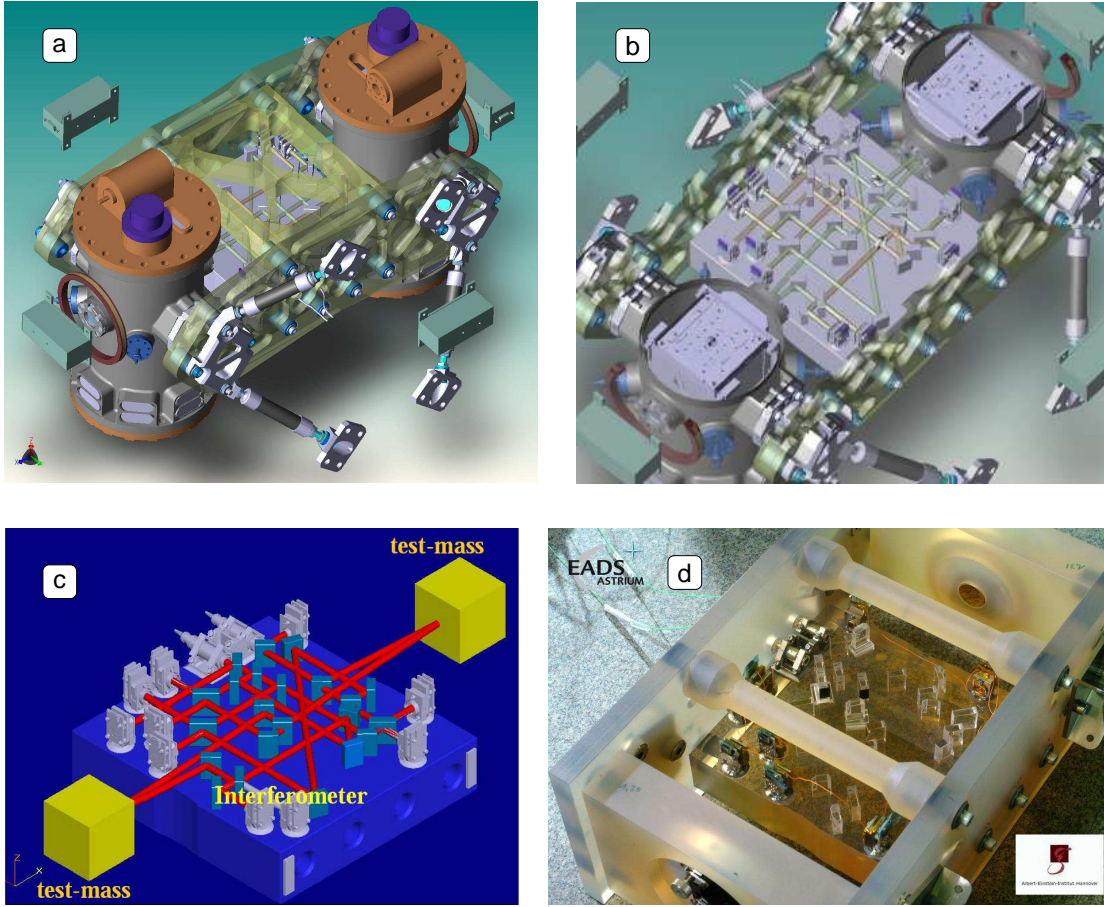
The LTP core assembly (LCA). a: CAD drawing showing two vacuum enclosures for the test masses, the optical bench between them and the side slabs holding the structure together. b: sectional view of the LCA showing the interferometry on top of the optical bench. c: the conceptual view of the LCA showing the test masses as mirrors part of the interferometer and omitting the vacuum tanks. d: engineering model of the optical bench. The test masses have been substituted by gold-coated mirrors for ground testing. Source: EADS Astrium.
